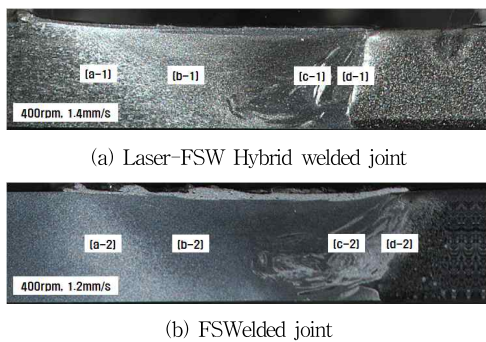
Cross-Sectional macrostructures of Laser-FSW hybrid weld and FSW joint
